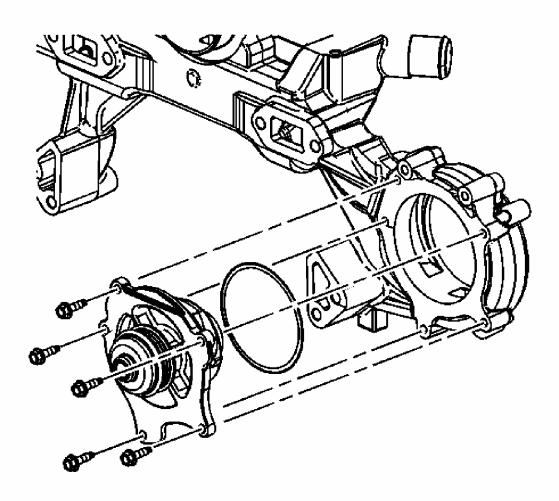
Identifying Water Pump Bolts Courtesy of GENERAL MOTORS CORP.
